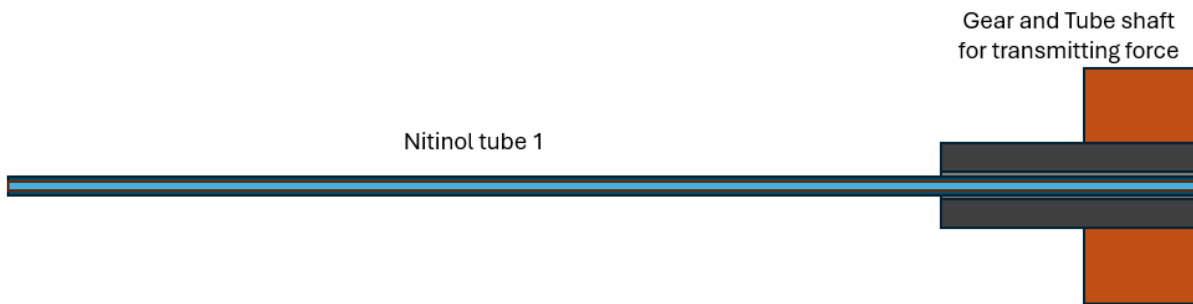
Temporary fix for connecting nitinol tube 1 as the inner diameter of stainless-steel tube 1 was too small to fit the outer diameter of the nitinol tube
